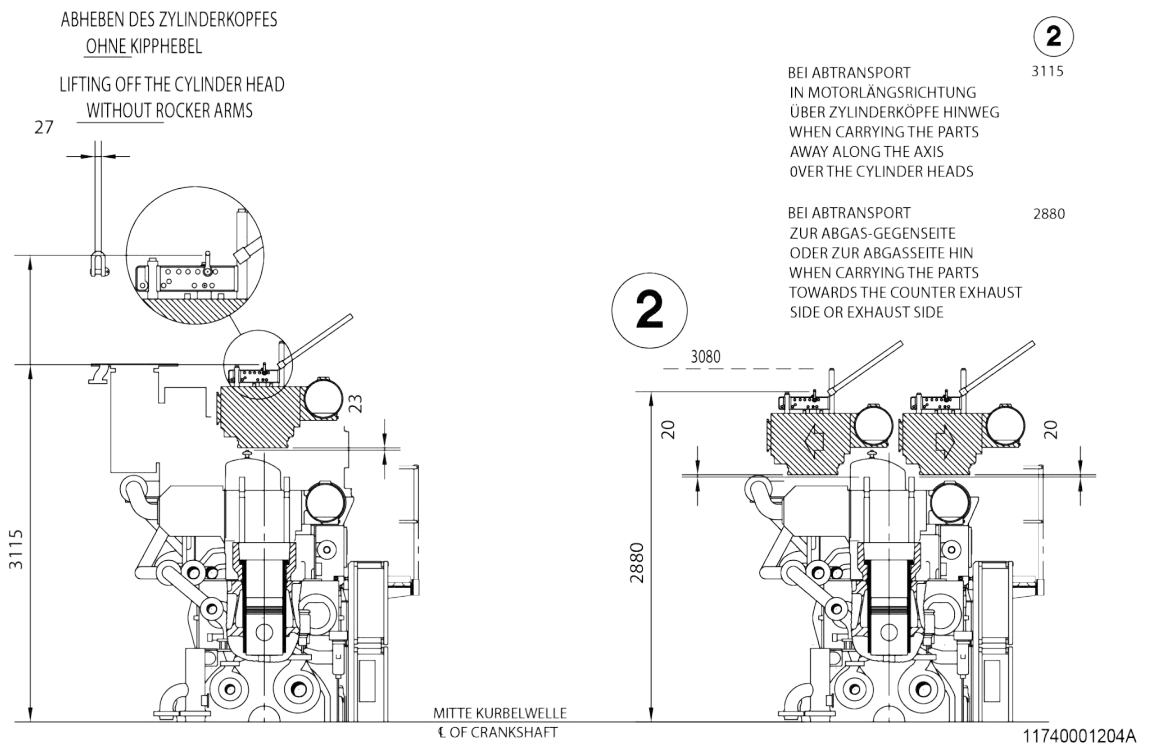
Piston removal – Lifting off the cylinder head without rocker arms – L engine
